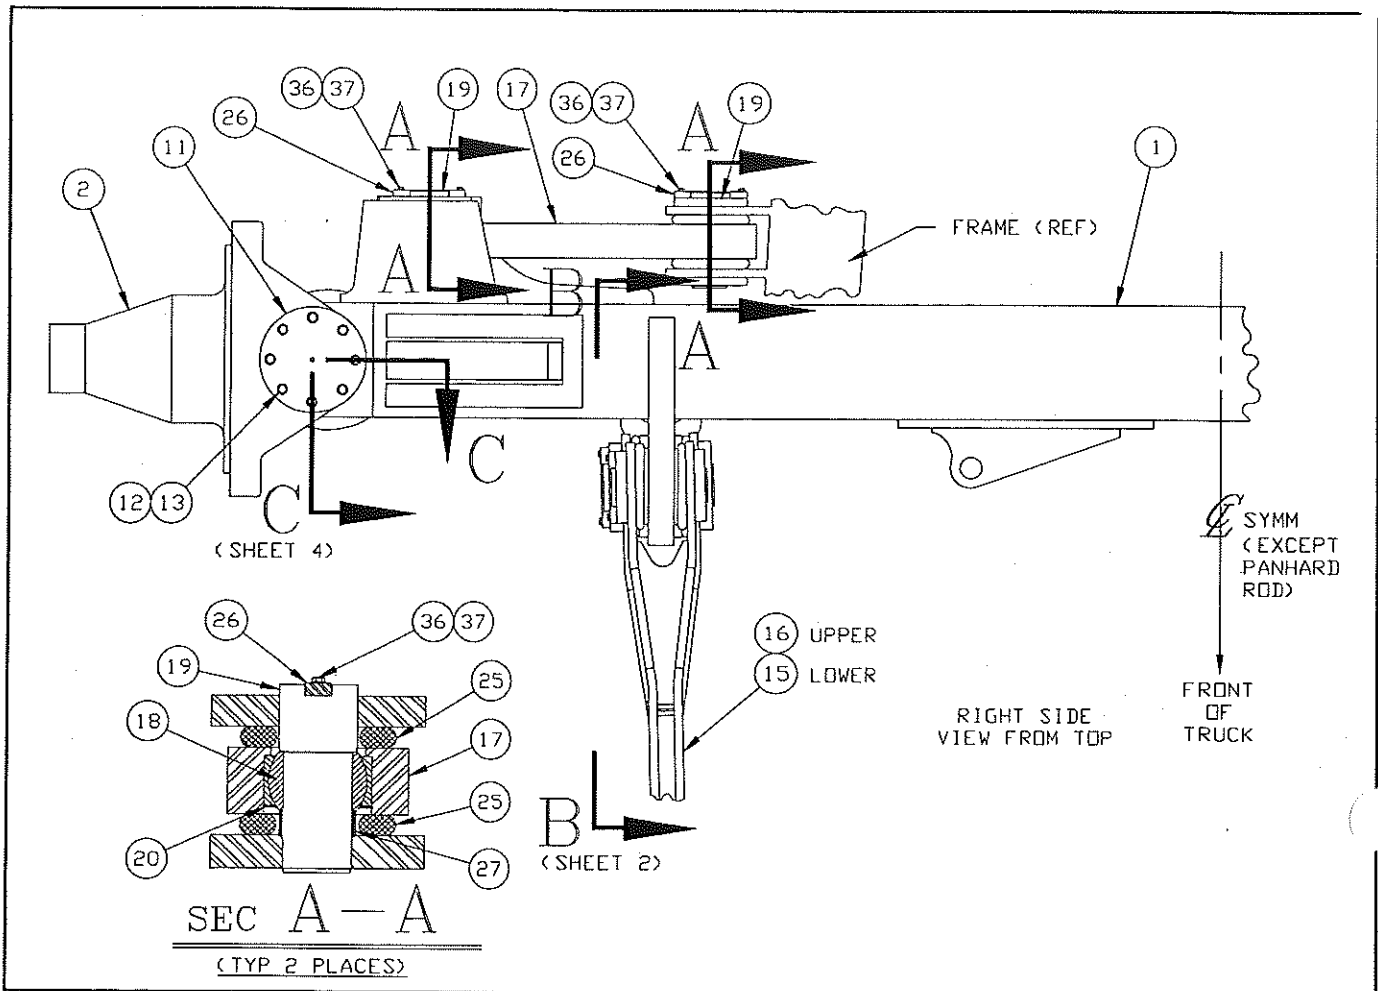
FRONT AXLE ASSEMBLY (A85224, SHEET 1 OF 4)
